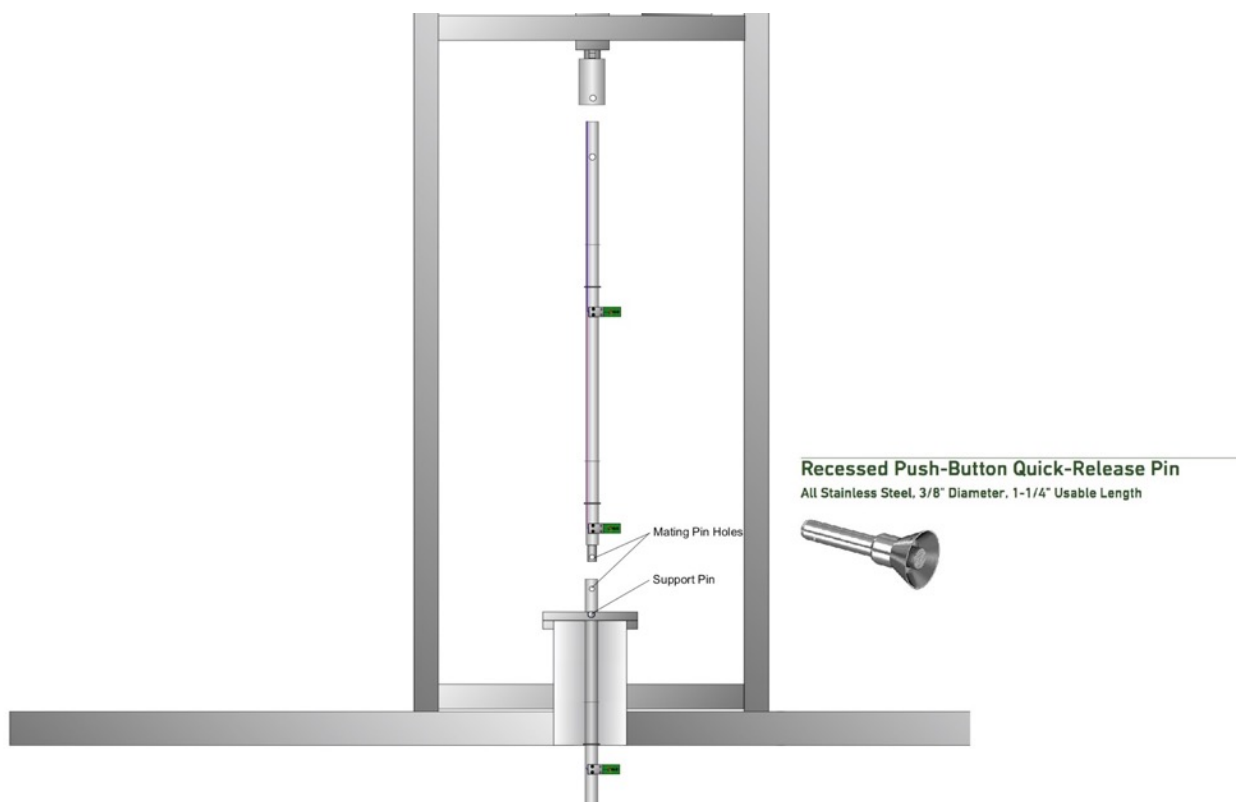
shows details of assembling the T-gradient monitor through the flange on the cryostat.
